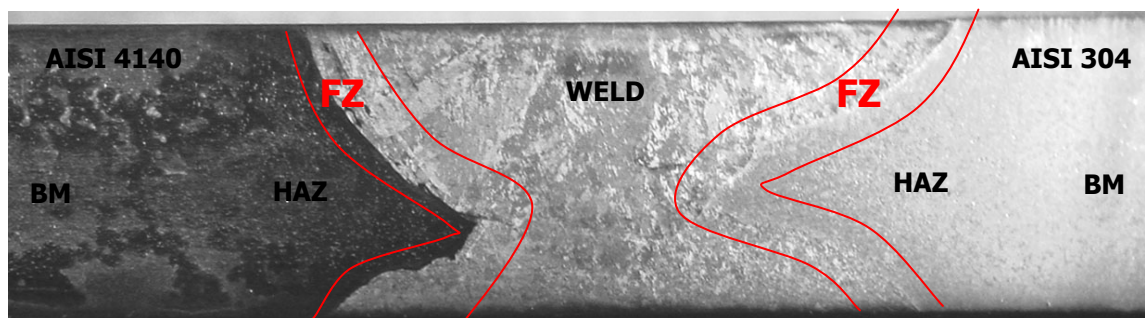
Macro structure of GTA welded AISI 4140 and AISI 304 dissimilar metals.
